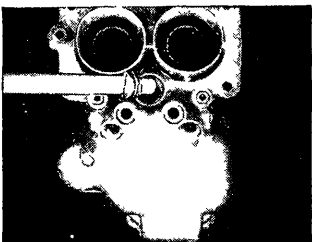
Remove pump check plug, screen and both pump checks, and washer from casting
